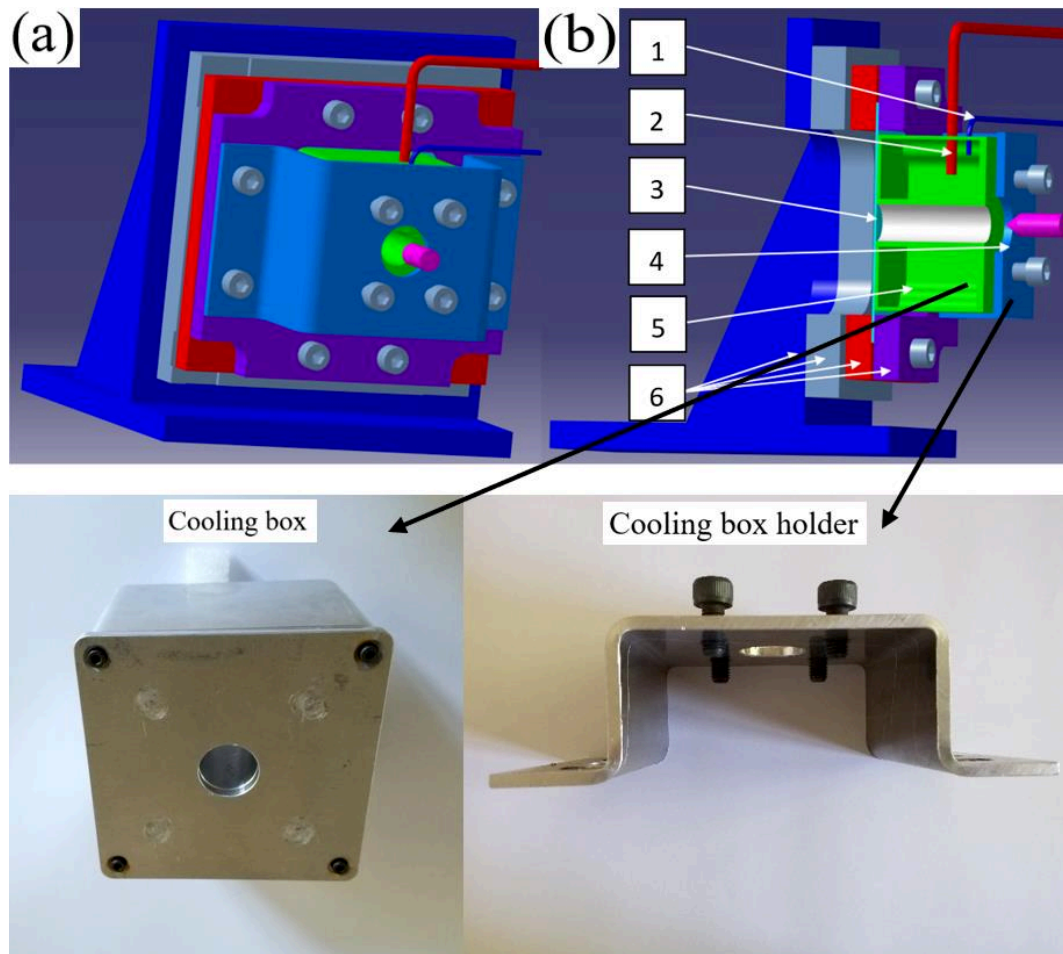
Arrangement of the cooling device on the ballistic impact device: (a) isometric view and (b) sectional view: 1) thermocouple, 2) pipe, 3) target, 4) cooling box holder, 5) cooling box, 6) target holder.
